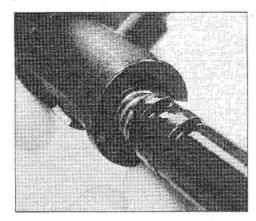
Refitting The Shroud/Firing Pin Assembly Back Into The Bolt Body
